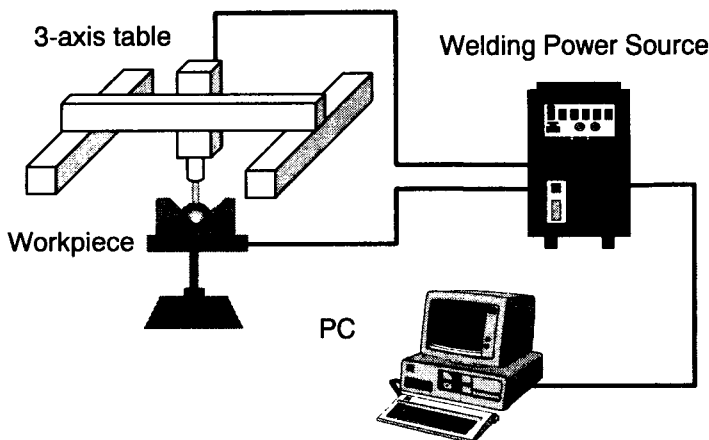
Experimental apparatus for rotating arc welding
